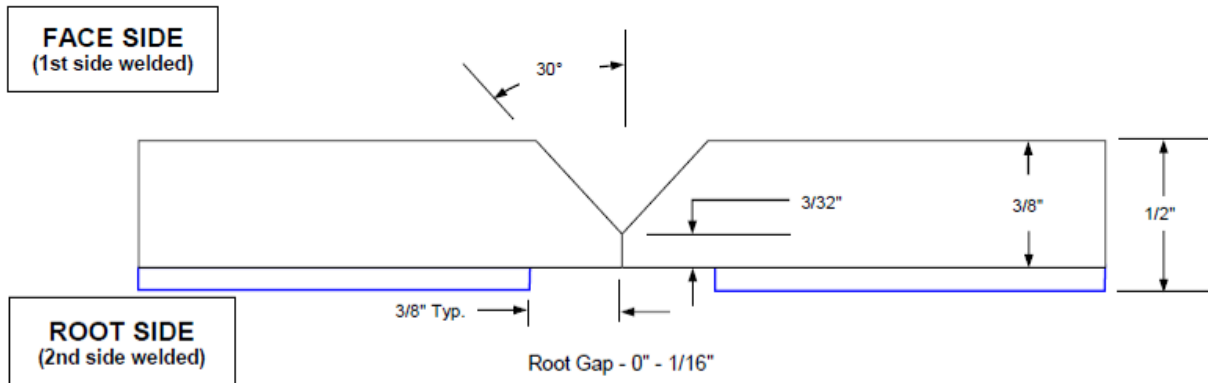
Welding geometry of the 304H/Ni201 and 304H/C22 explosion clad plates
